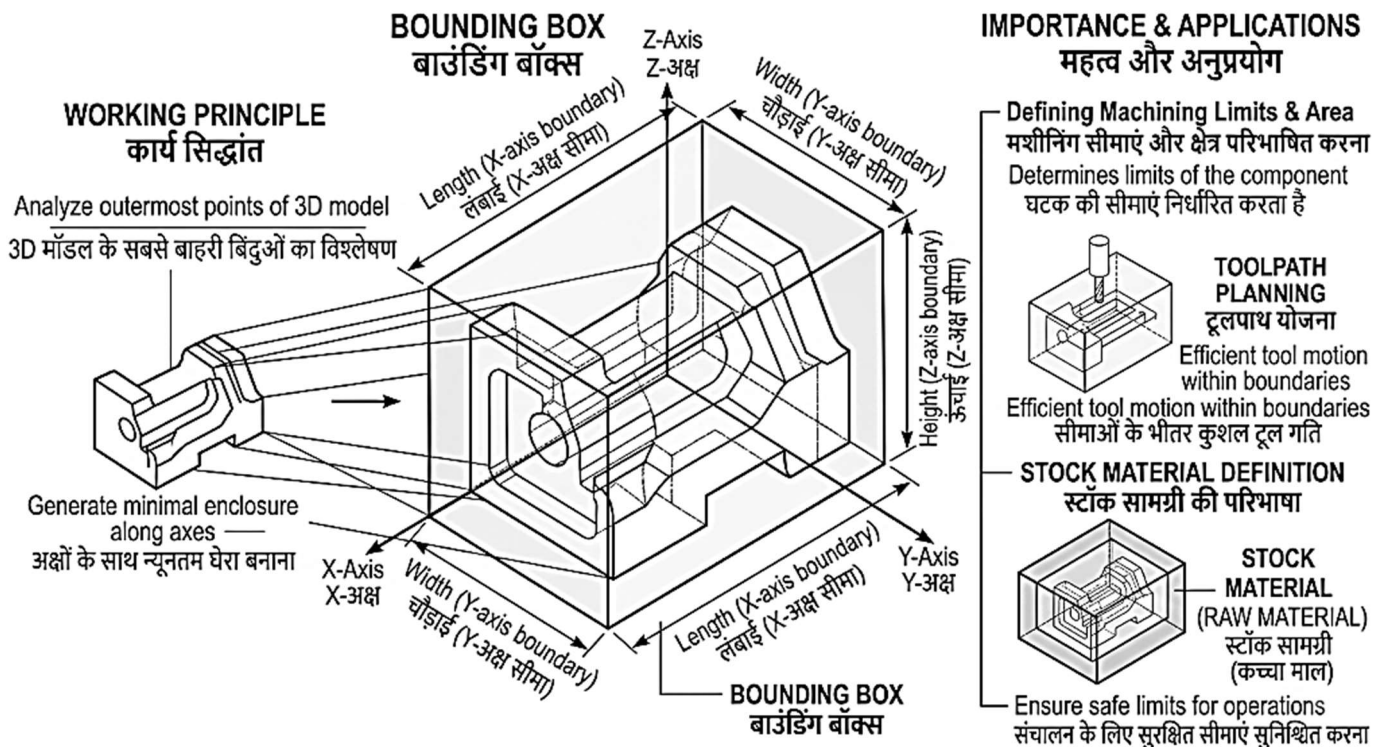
Bounding Box for CAM Machining Limits | CAM मशीनिंग सीमाओं के लिए बाउंडिंग बॉक्स
